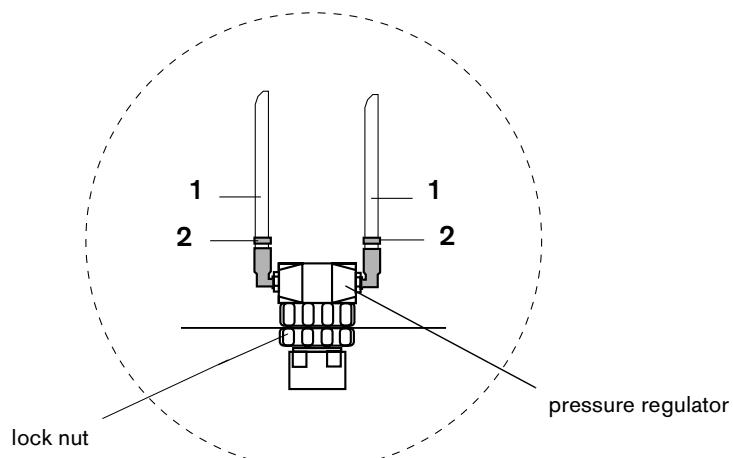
Side View of the Plug-In Unit (location of the hoses)
